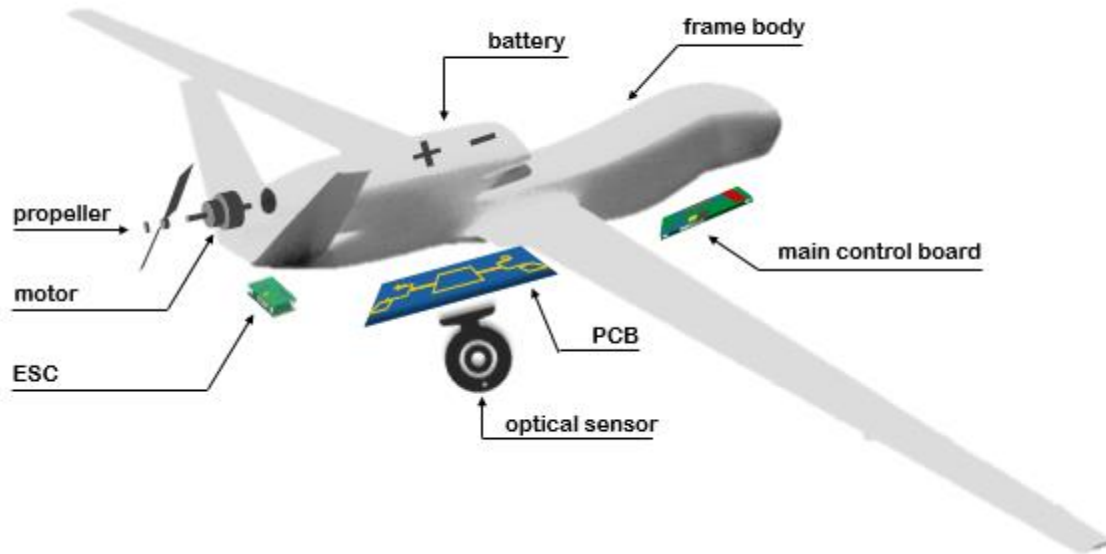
Simplified fixed-wing exploded assembly diagram [Ellerbroek, 2014]
